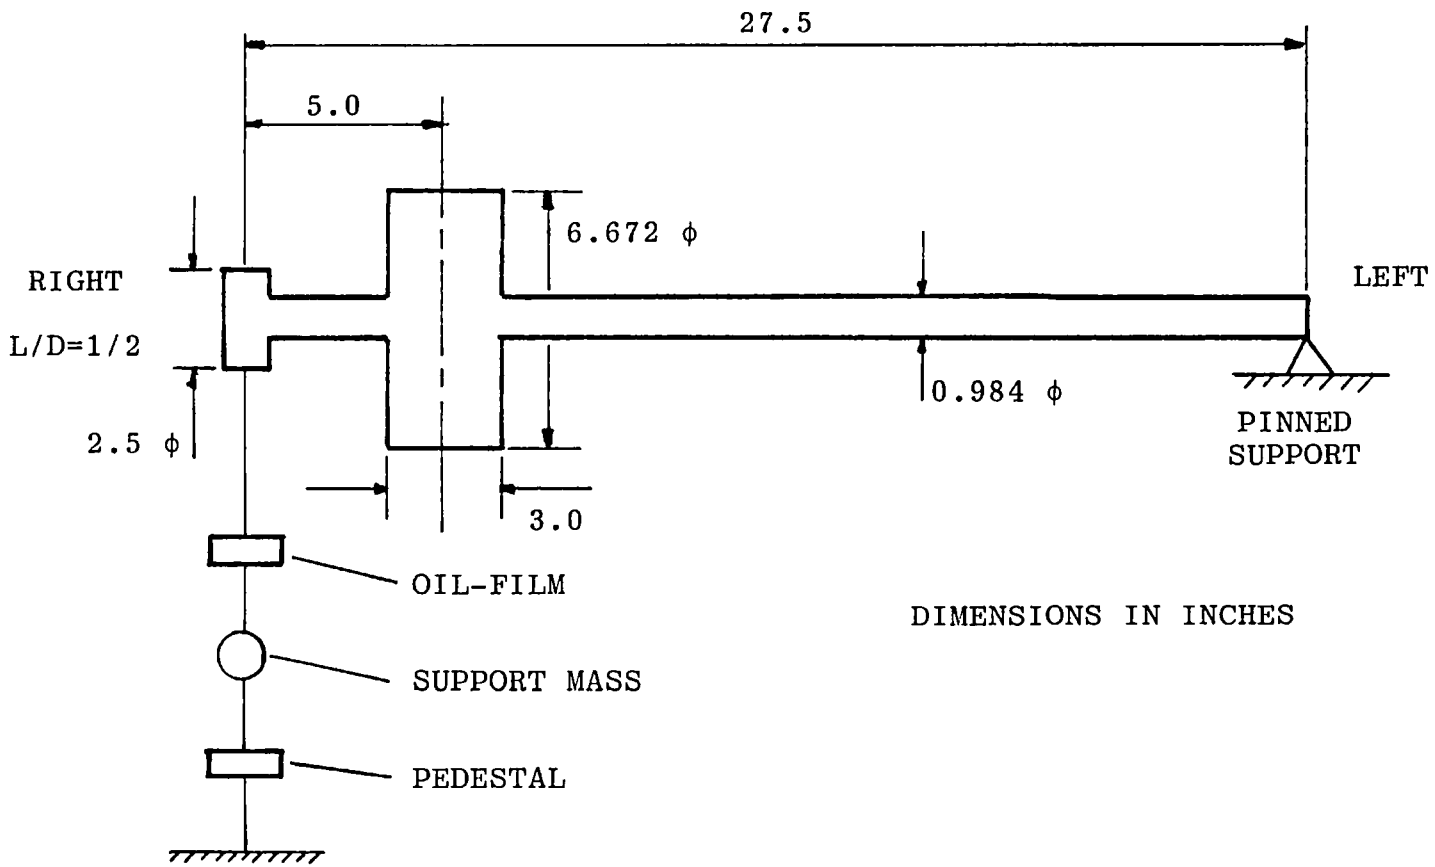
Principle Dimensions of the Test Rotor-Bearing System
